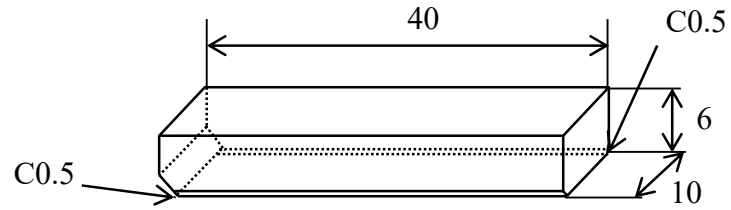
Shape and dimensions of 4-point bending specimen (unit in mm).
